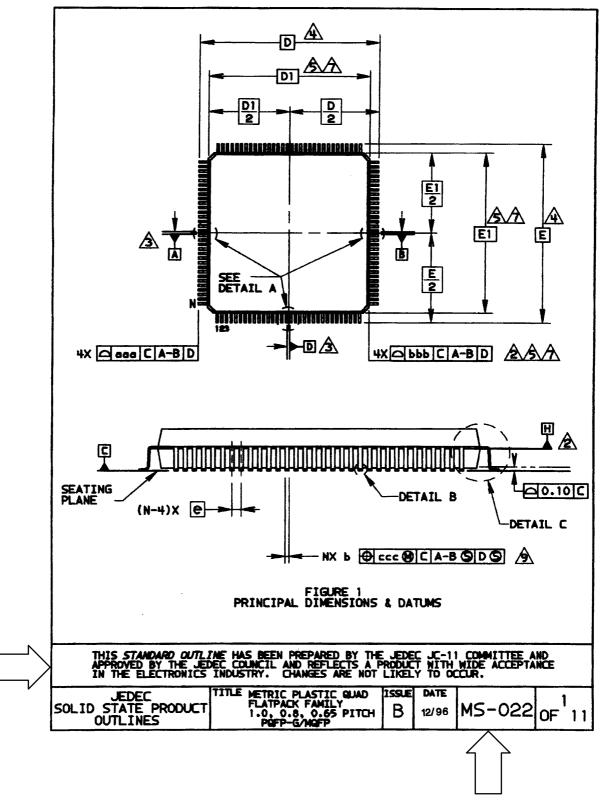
Example of a Standard-Outline Drawing Top Sheet
